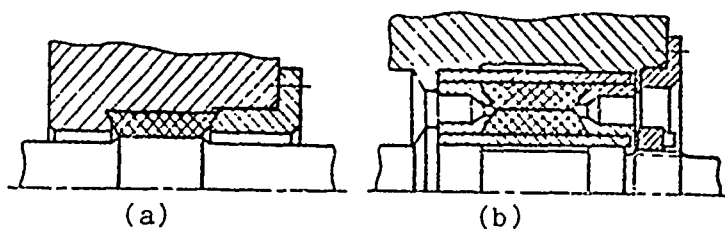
Dry-friction bearings: a - with graphite inserts; b - with inserts made of tungsten and titanium carbides.
